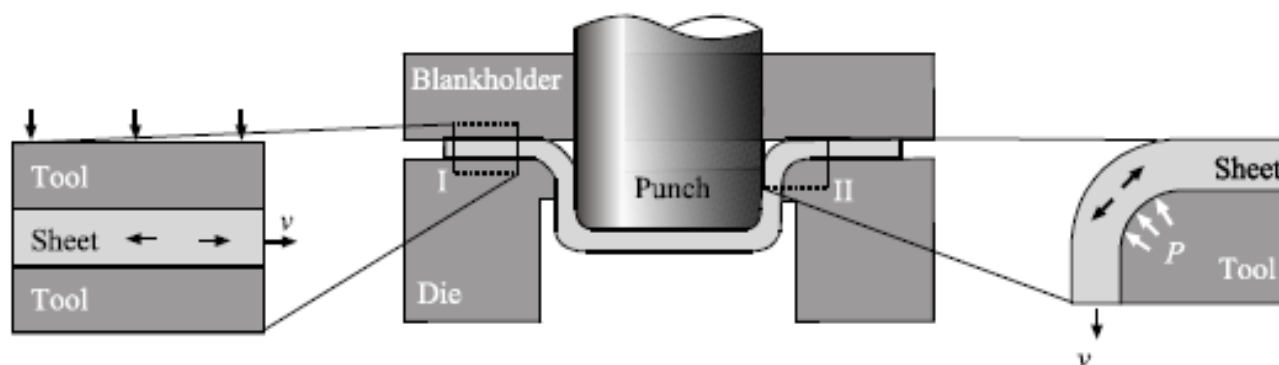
Schematic illustration of the deep-drawing process, adapted from [3].
